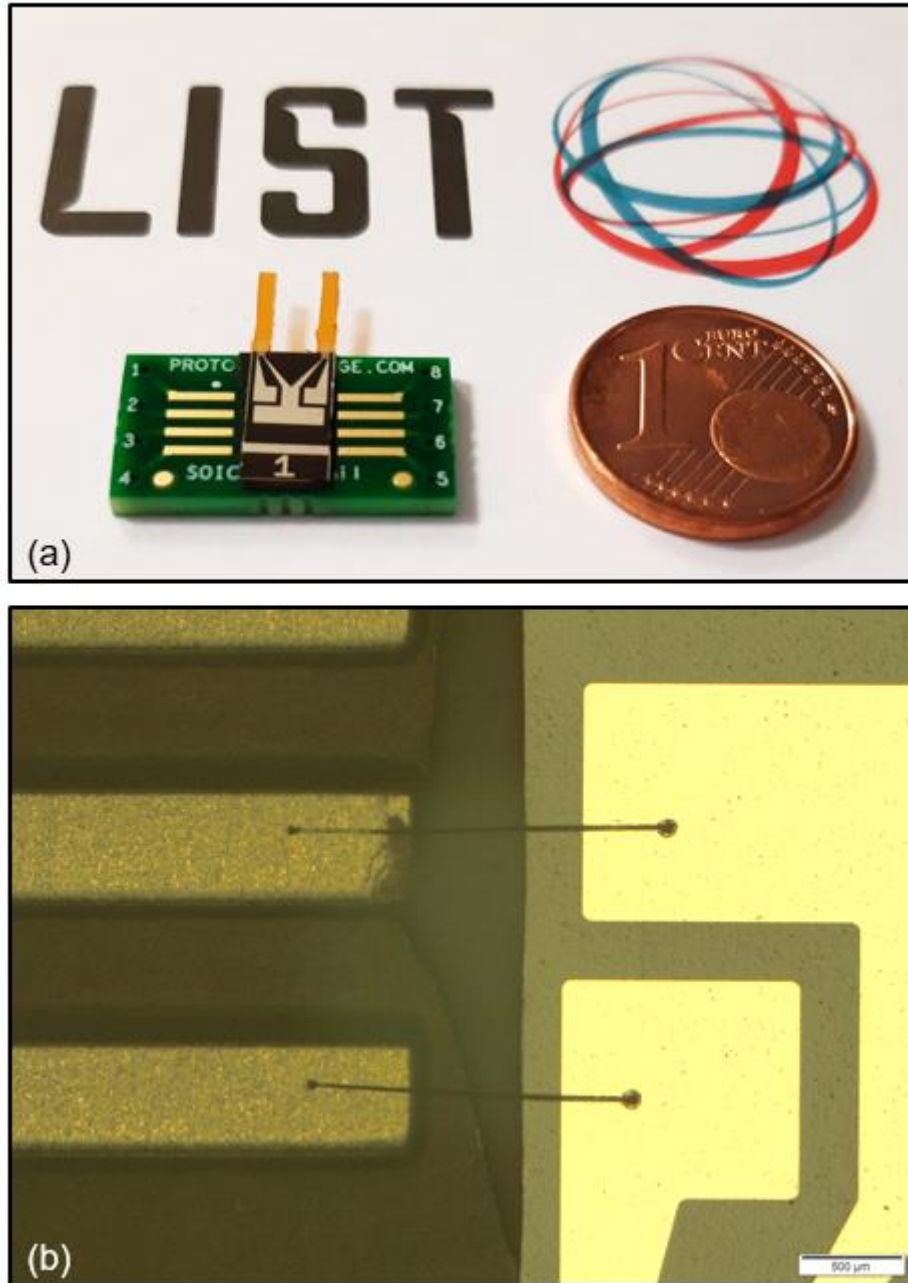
(a) General view of the piezotronic strain sensors integrated on polyimide cantilevered structures and wire bonded on an interfacing PCB. (b) Ball bonding connections between the sensors' Pt pads and the corresponding Au pads on the PCB.
